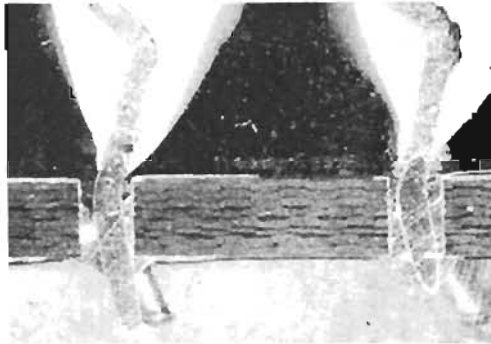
Microsection of through-hole fillet showing poor fillet (EPS)
